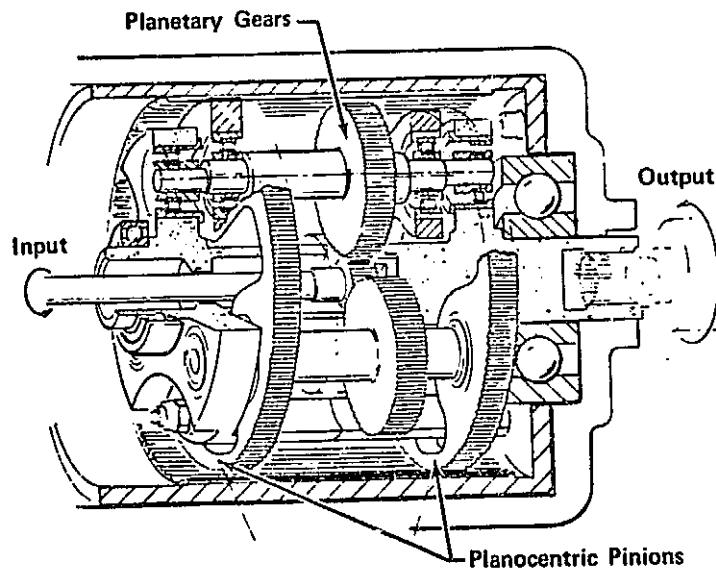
Planocentric Reducer Provides Large Mechanical Advantage in Small Package
